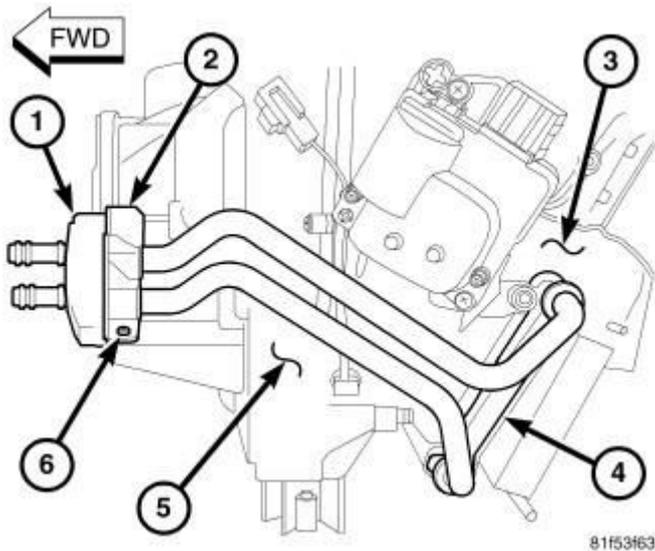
Foam Seal, Flange, Air Distribution Housing, Heater Core, HVAC Housing & Screw
